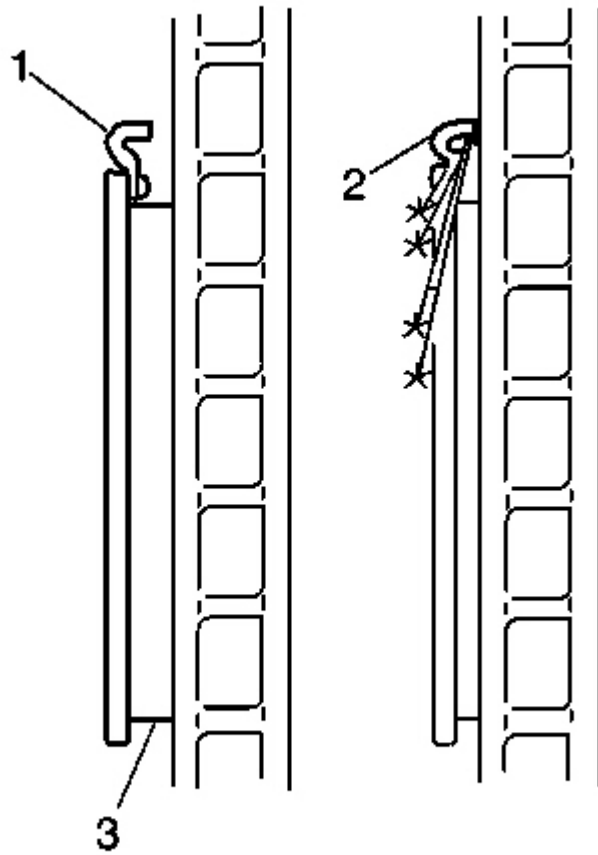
View Of Brake Pads & Audible Wear Sensors
